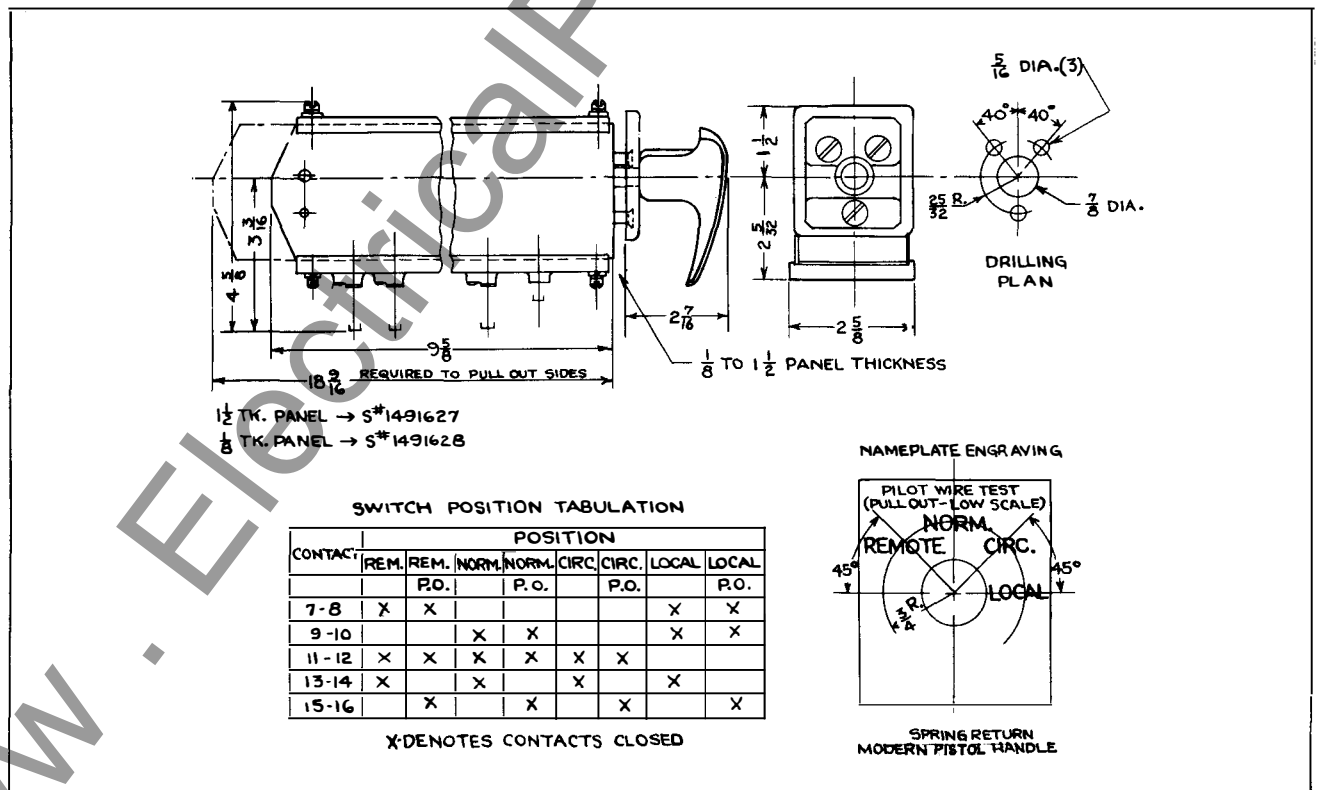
Outline and Drilling Plan of the Type W Test Switch. For Reference Only.
